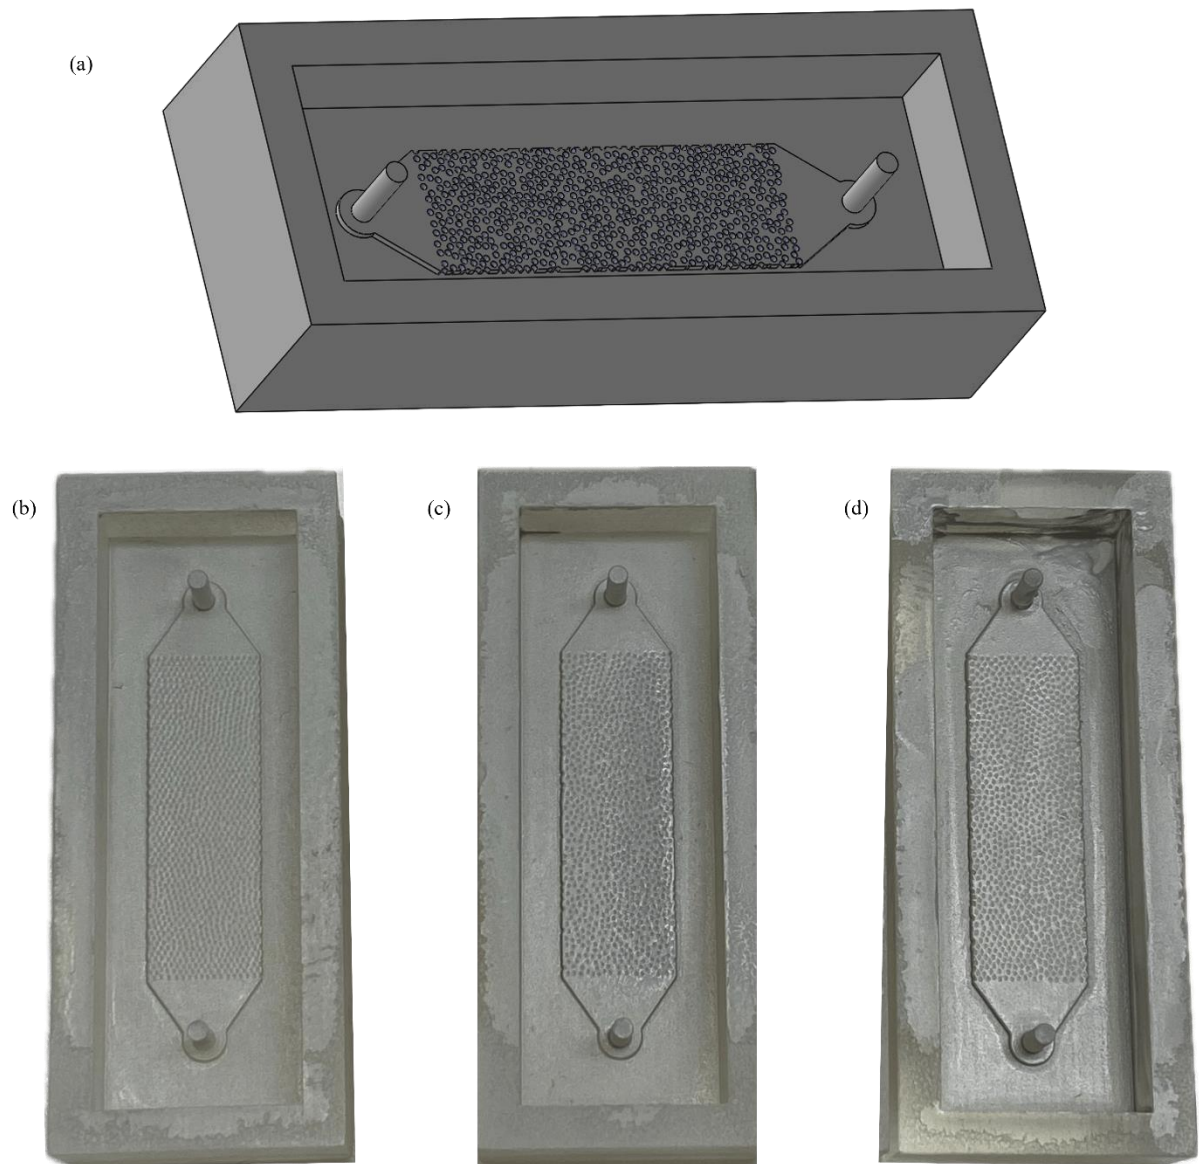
3D-printed mold design and fabrication. CAD model of the mold with a pillar size of 350 μm and porosity of 0.6. (b-d) Top-view of the 3D-printed molds after post-curing and spray-coating with a pillar size of 300 μm and porosities of 0.5, 0.55, and 0.6, respectively. All designs have a 60 μm pore throat and 400 μm height.
